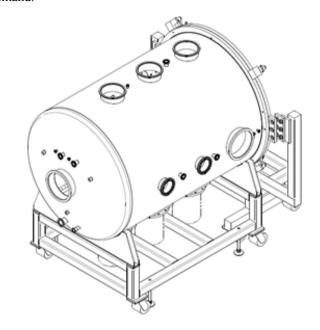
Technical drawing of BUSTLab vacuum chamber
